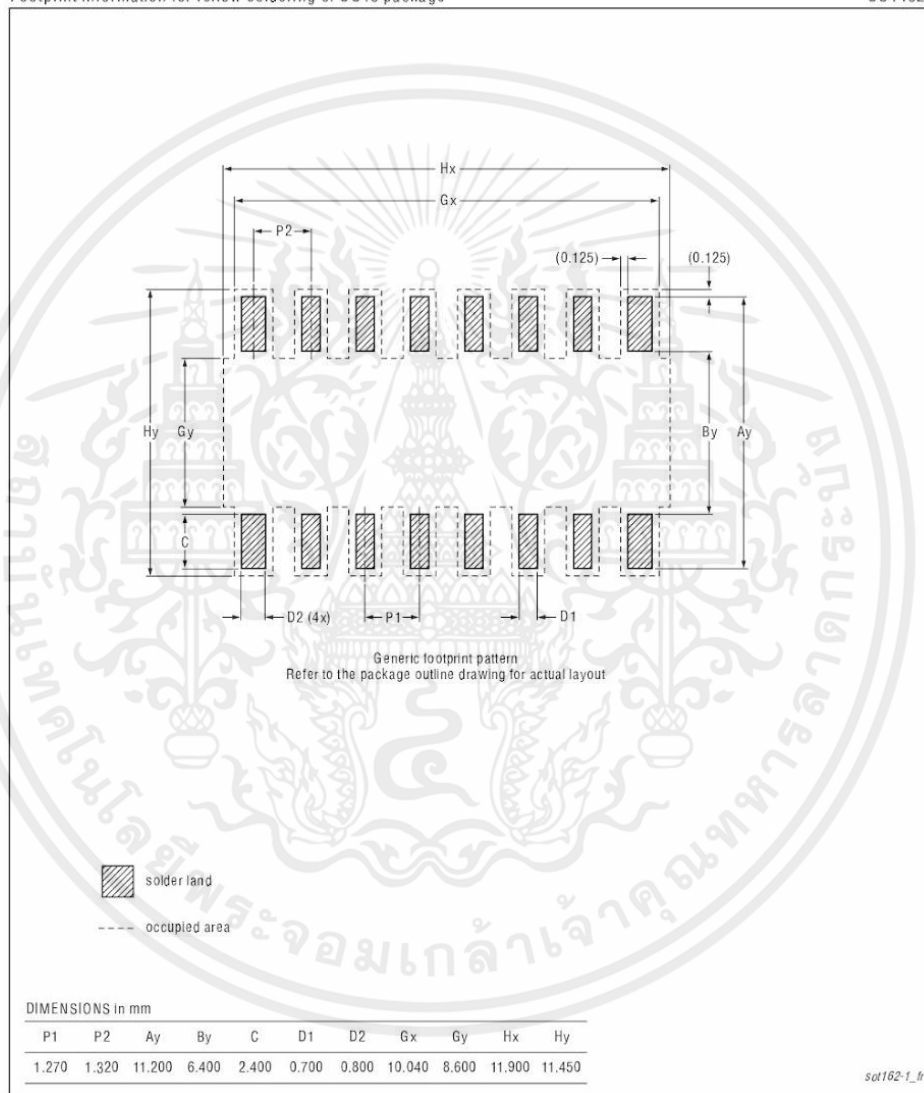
PCB footprint for SOT162-1 (SO16); reflow soldering
